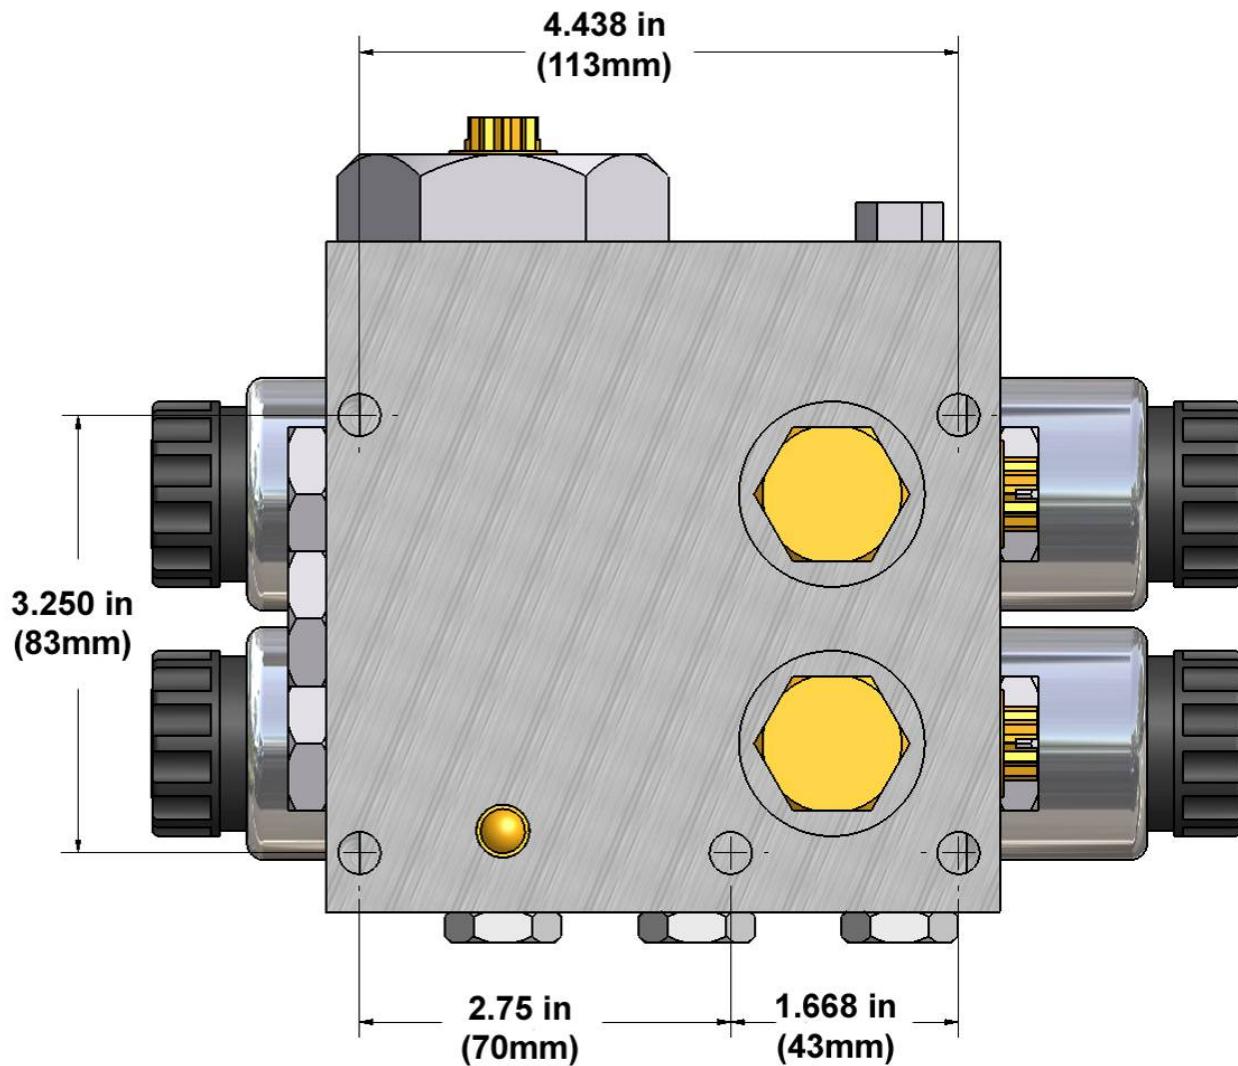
NORAC Valve Block Mounting Hole Dimensions
